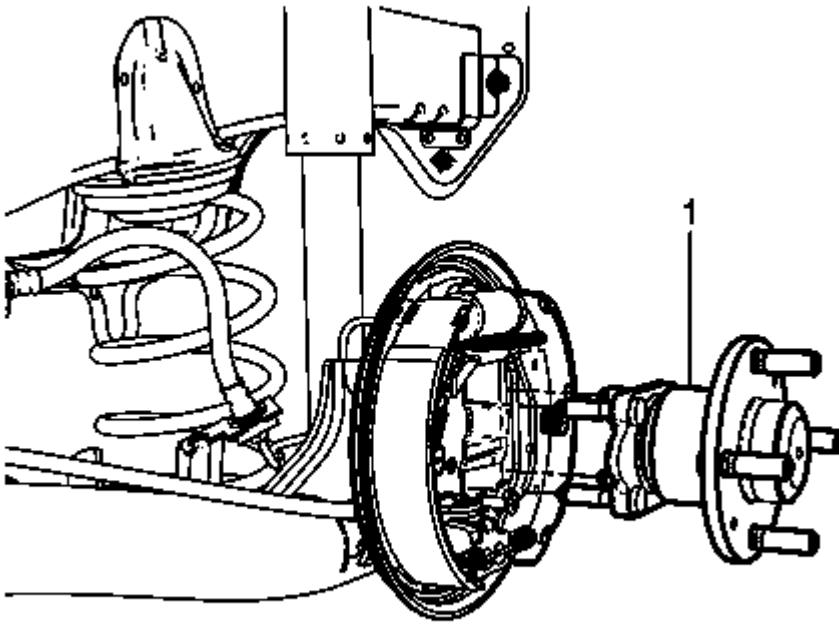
Wheel Bearing/Hub And Spindle Assembly
